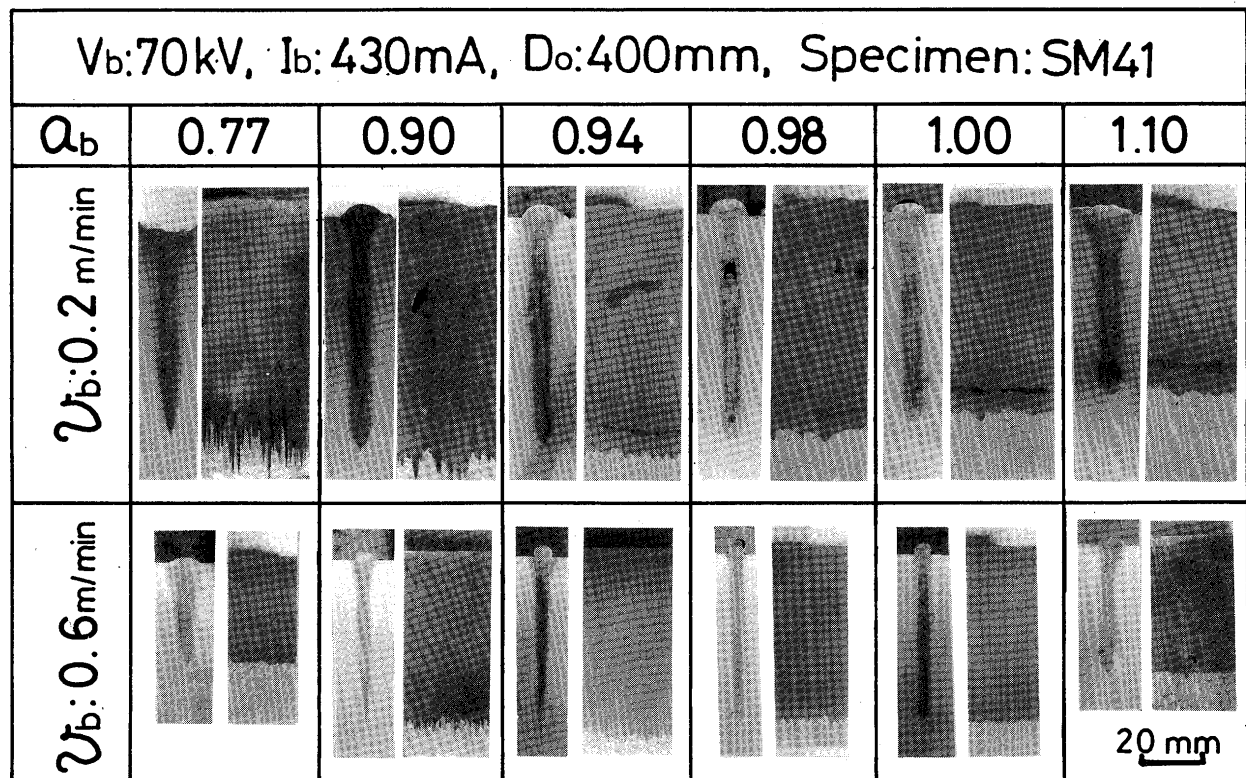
Examples of transverse and cross sections of beads welded by single electron beam welding.
